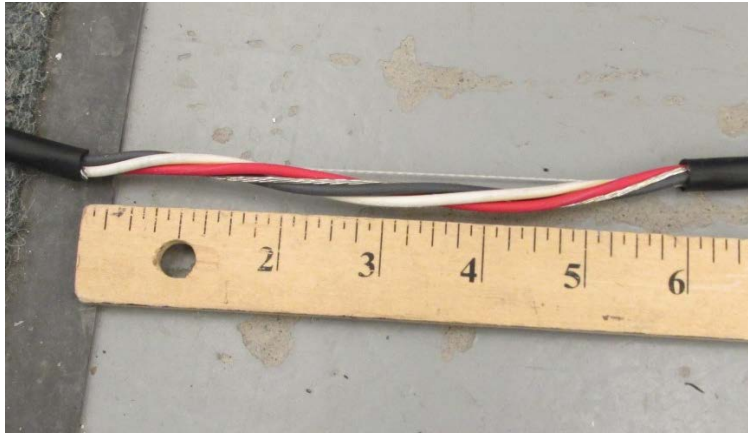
Mechanical defect consisting of 6 in. section of removed jacket and shield along the three-conductor shielded cable
